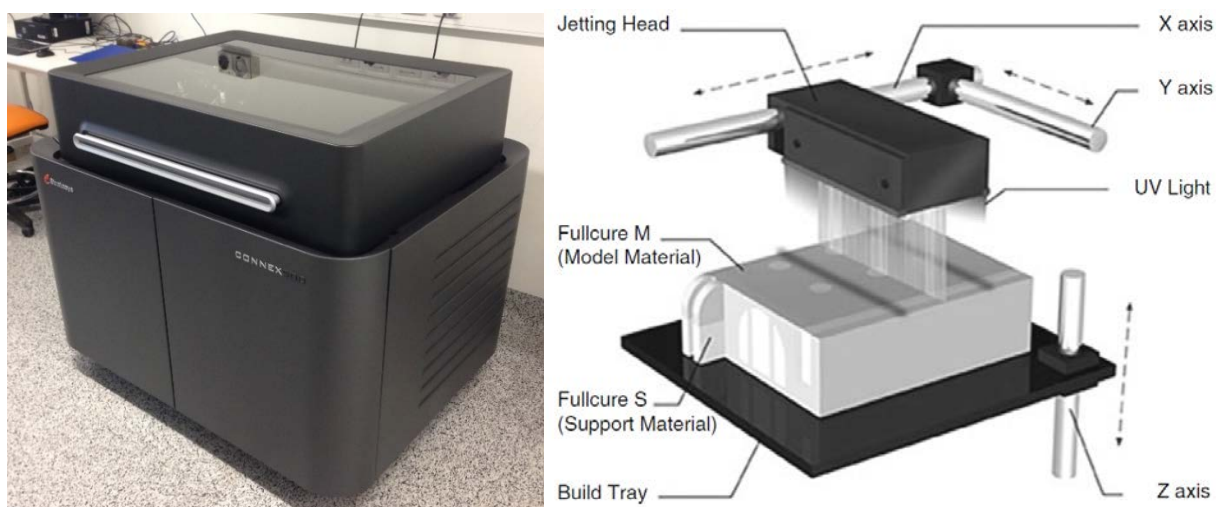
a) Connex500 used for fabrication of experimental specimens. b) Schematic of polymer jetting process used by Connex500 [112]
